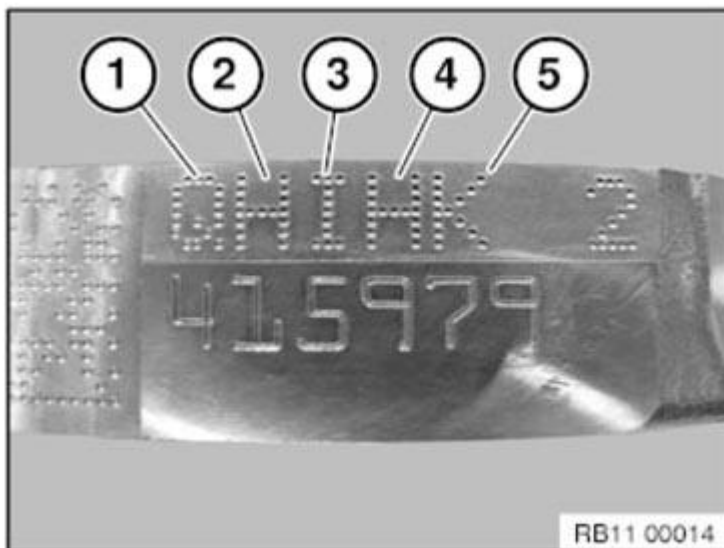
Identifying Color Assignment On Crankshaft 1 To 5
